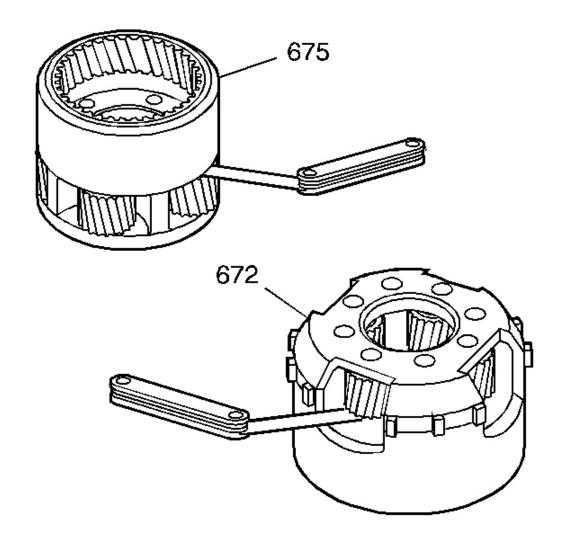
Checking Input and Reaction Carrier Pinion End Play With Feeler Gage Courtesy of GENERAL MOTORS CORP.
